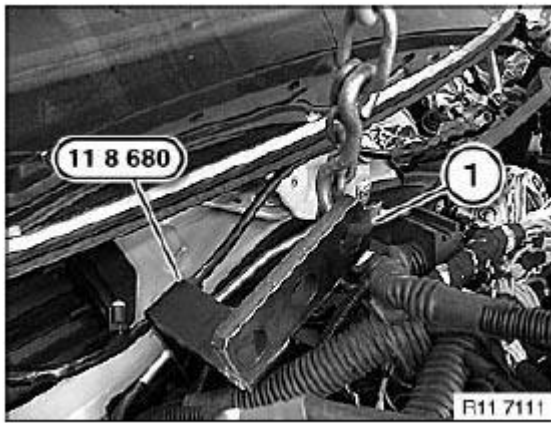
Identifying Special Tool 11 8 680 And Eye
